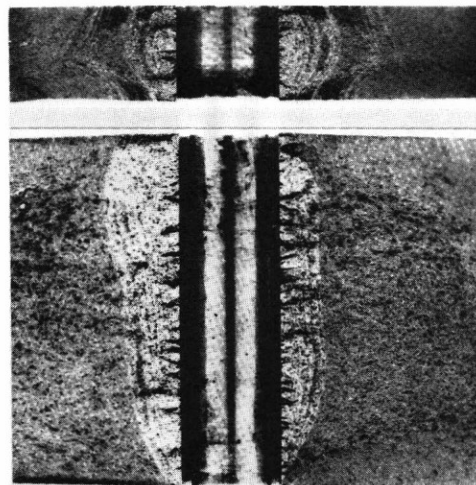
Fatigue fractures of non-cold-expanded hole specimens of thickness 8 and 30 mm
